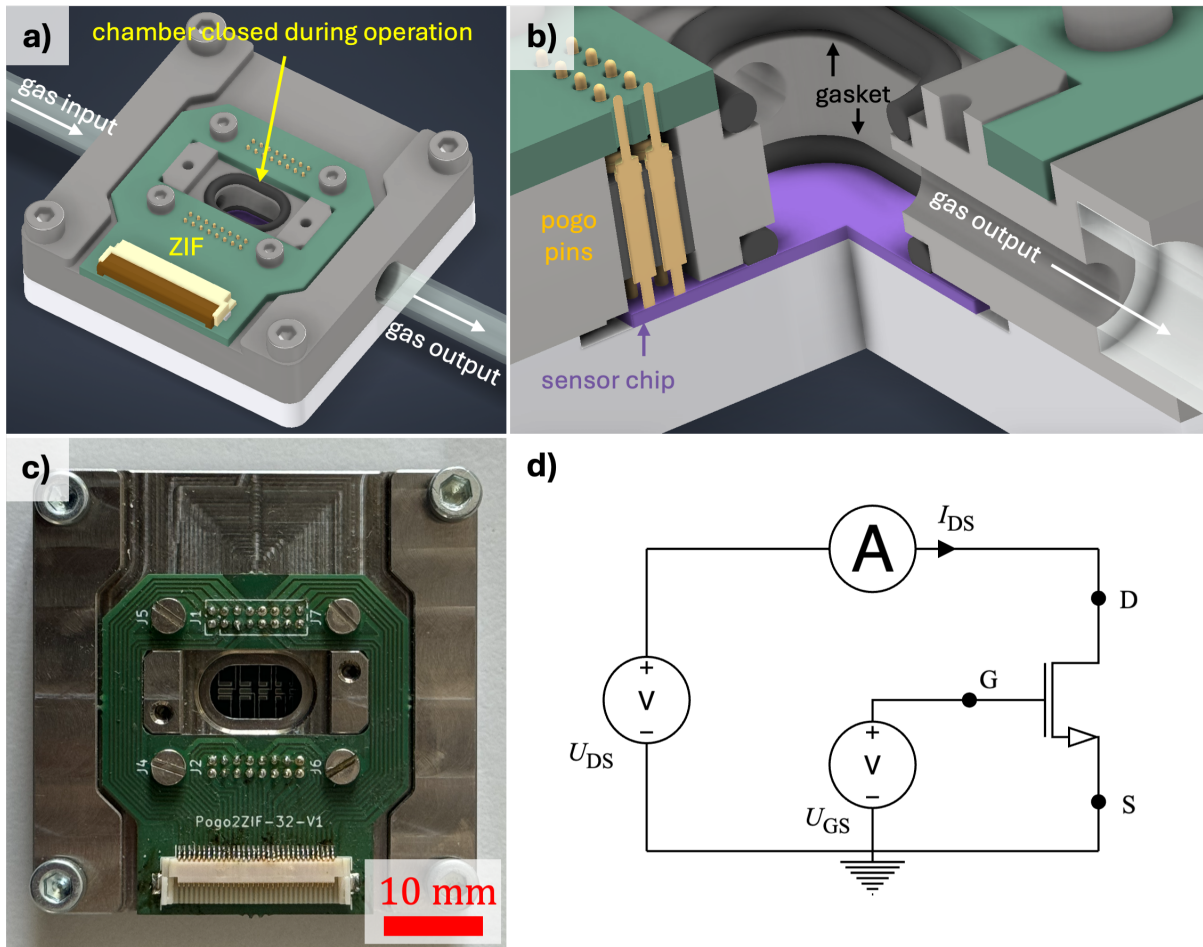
Custom designed and machined housing and electrical connections. a) CAD illustration of the housing and PCB, b) quarter-section view focusing on the sensor chamber, c) machined housing and soldered printed circuit board (PCB), d) electrical circuit diagram of the ChemFET measurement setup
